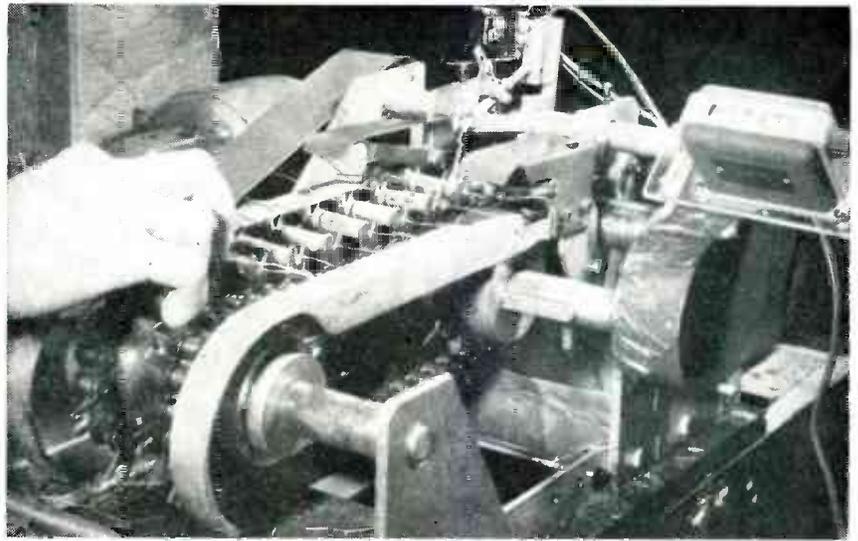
Automatic machine developed by DuMont engineers for precutting leads of components at high speed. Motor-driven chopping blades function in a manner similar to the operation of pruning shears
